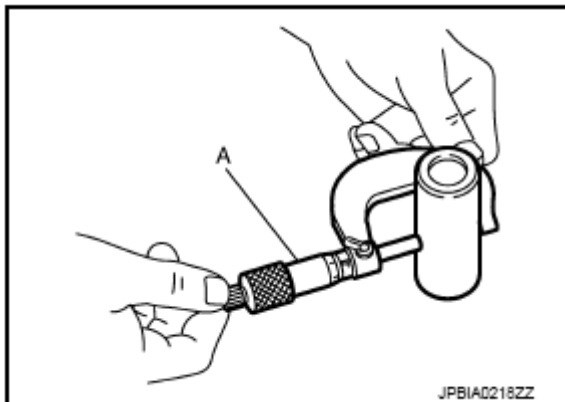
Measuring Outer Diameter Of Piston Pin Using Micrometer
